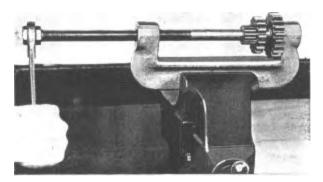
Removing Reverse Idler Shaft Bushings-J-488 Bushing Press and Adapters
